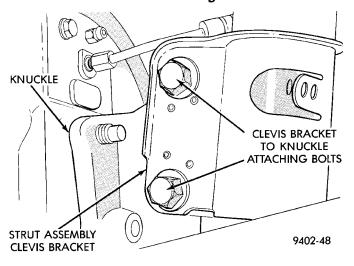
Rear Strut Clevis Bracket Attaching Bolts
